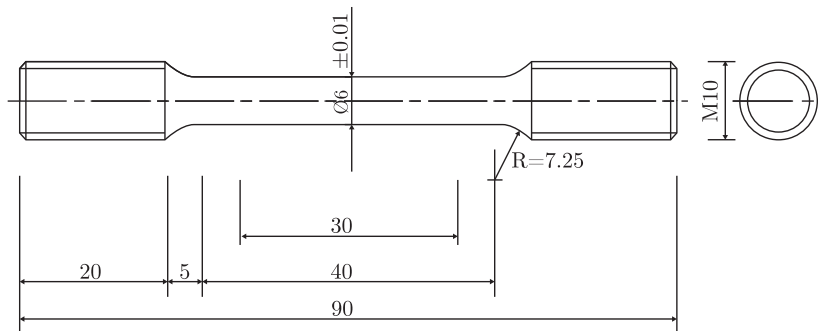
Geometry of the tensile specimen, all dimensions in mm.
